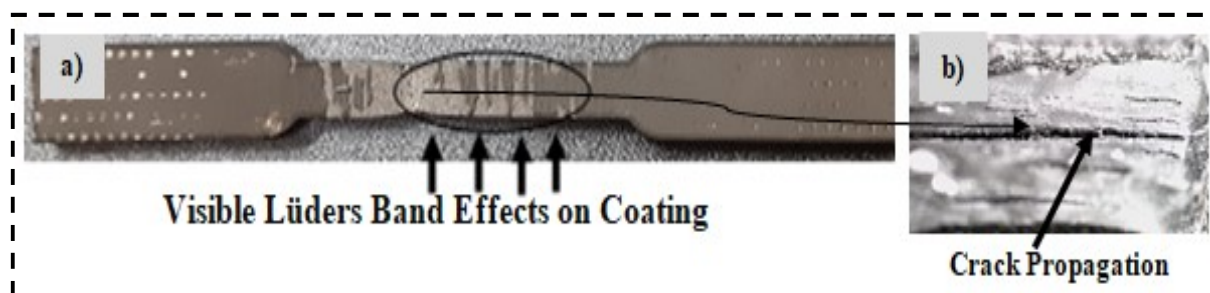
a) Fractured coated samples of tensile test with their b) fractography of fractured surface for experiment 2 (CpLCE-2))
